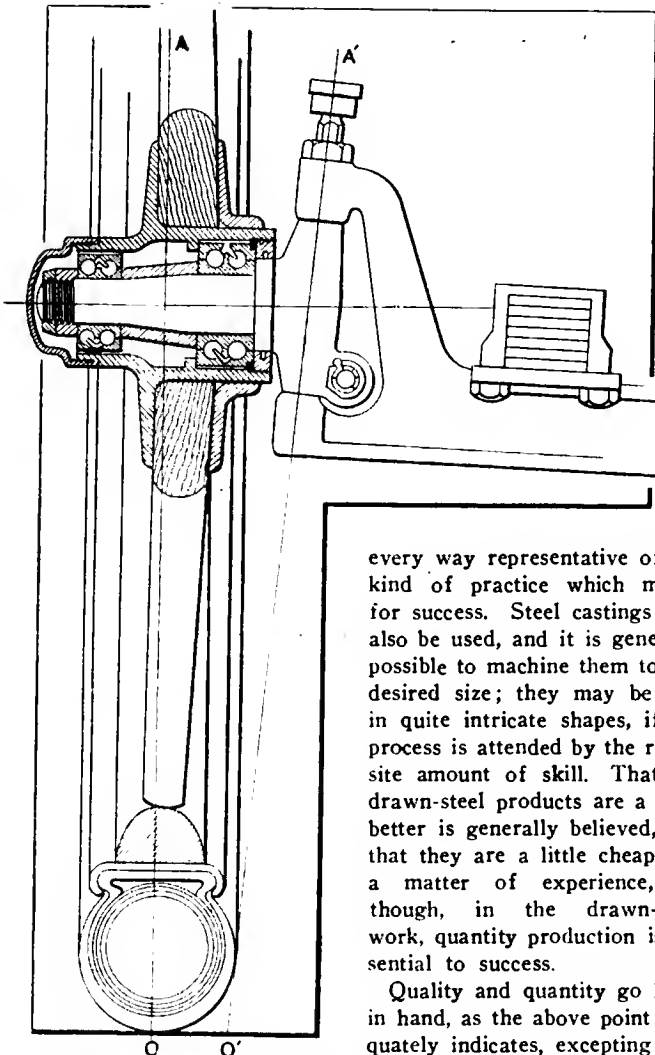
Diagrammatic front wheel assembly, with New Departure ball bearings, showing the difference O O'
